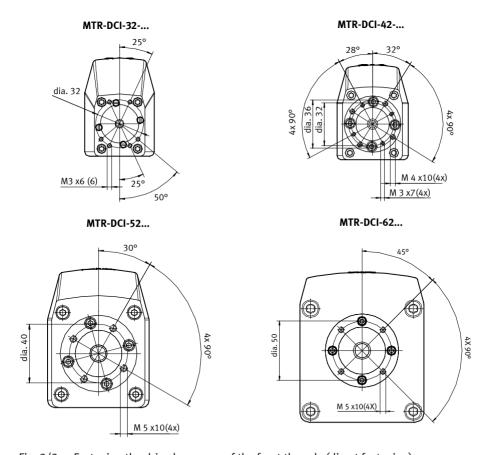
/2: Fastening the drive by means of the front threads (direct fastening)
